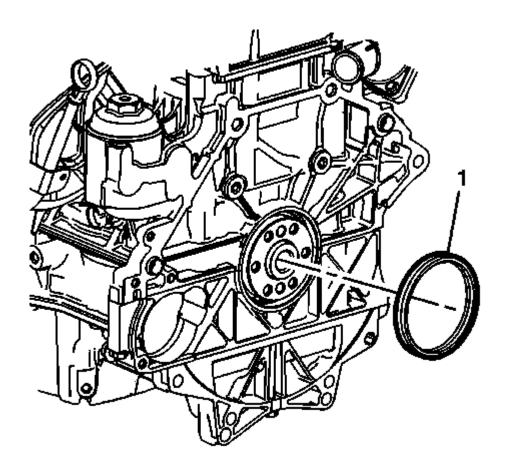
Crankshaft Rear Oil Seal Courtesy of GENERAL MOTORS COMPANY
